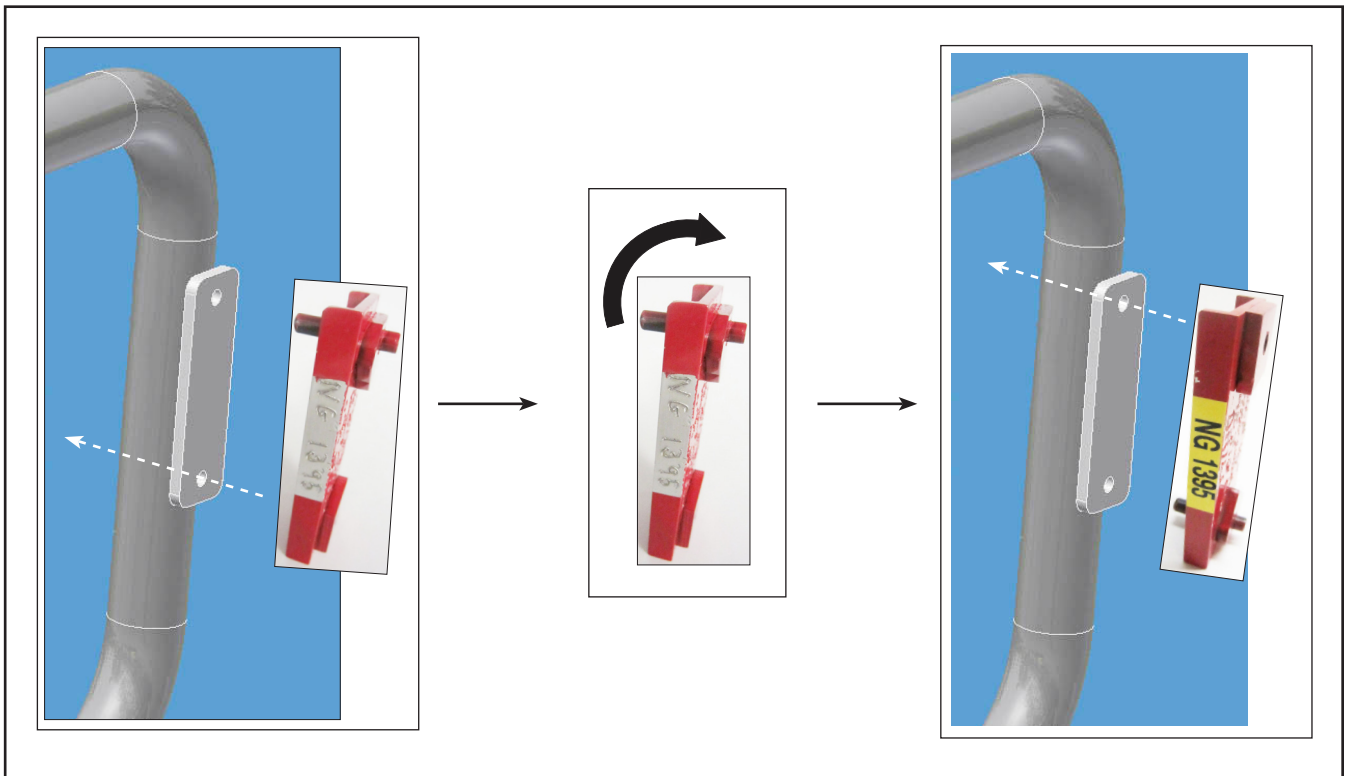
Through the Handrail: Drill the Bottom Hole, Flip the Jig, and Drill the Top Hole
